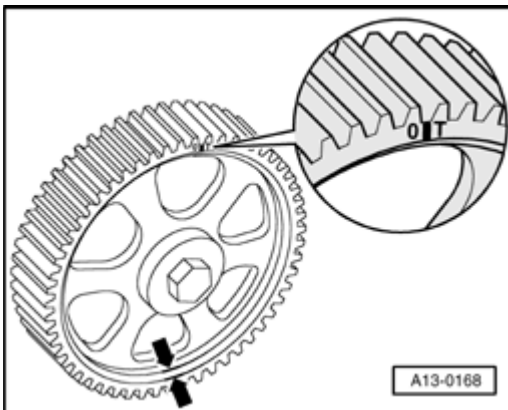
Identifying Camshaft Gear Thin Rib Toward Outside And TDC Marking Visible
